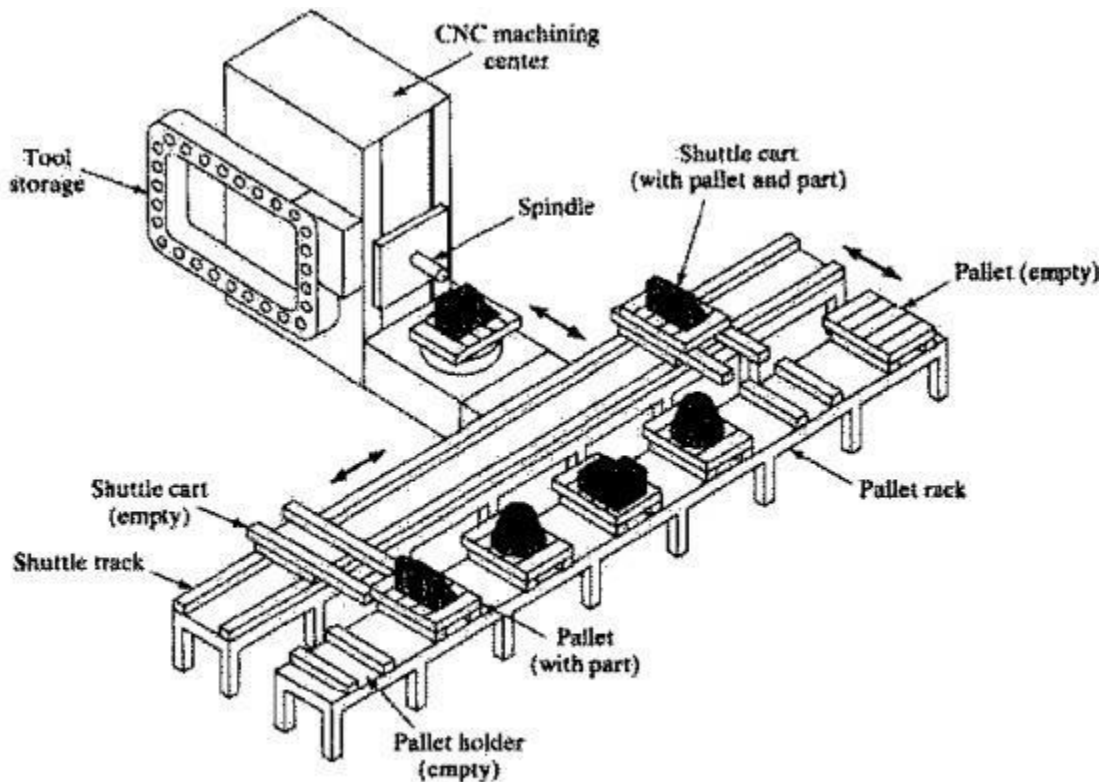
Single machine cell consisting of one CNC machining center and parts storage unit.
